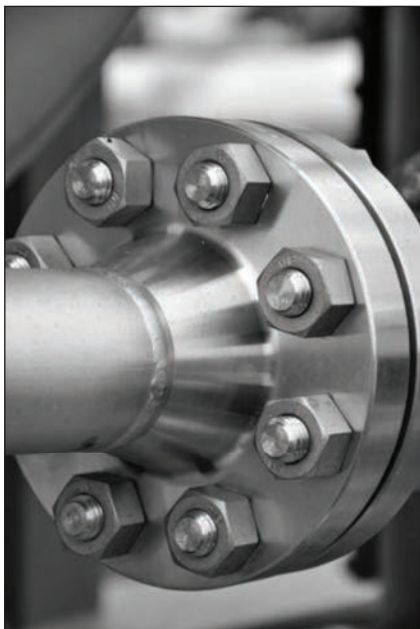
A typical welding neck flange is shown in this photo
